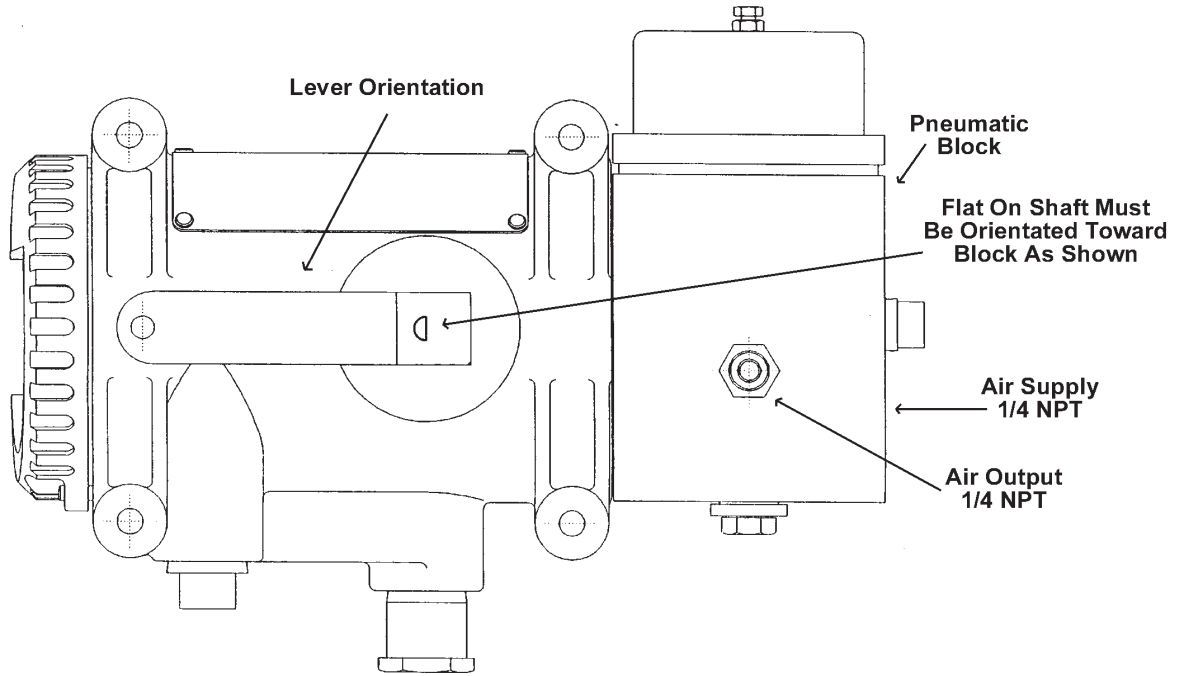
SVI Rotary Mounting Bracket with Valve Side Lever on Camflex Valves
